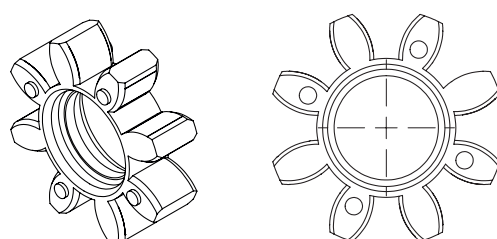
Sprocket for linear modules HM-B, linear tables HT-B and cantilever axes HC
